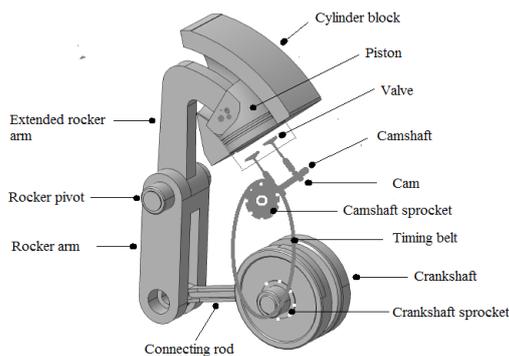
A proposed design for the Crank-rocker engine geometry.
